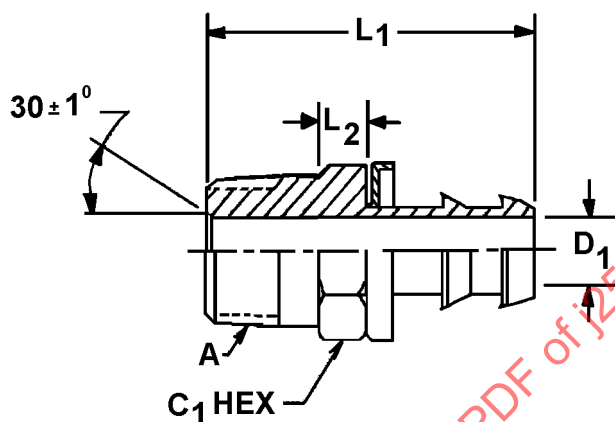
MALE PIPE THREAD PUSH-ON HOSE FITTING
